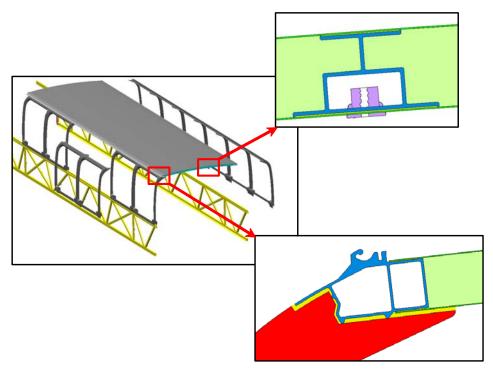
Proposed Lightweight Hybrid Roof Design
